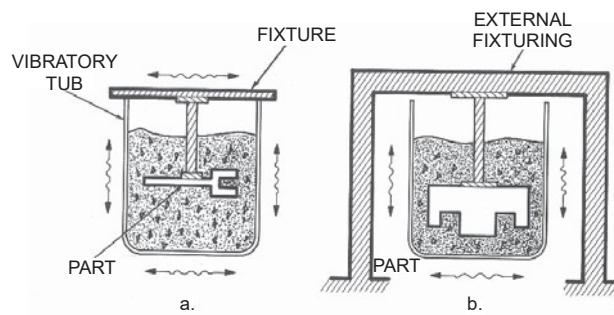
Part fixturing results in faster deburring cycles. External fixturing is used for heavy parts. (Sofronas 1976)
